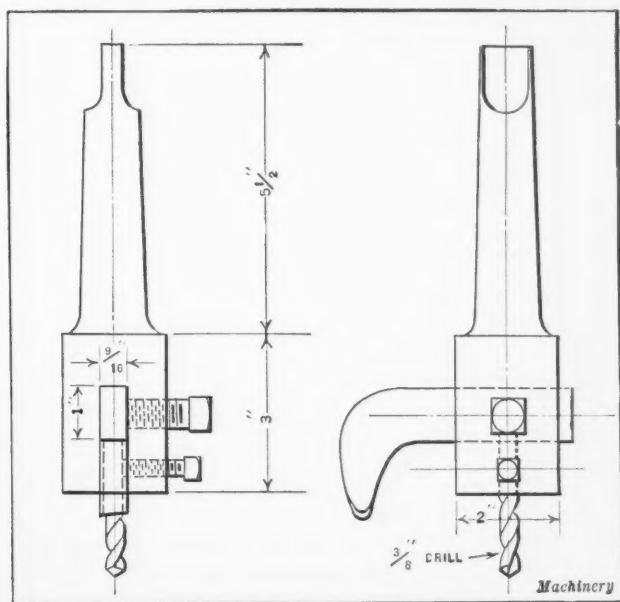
Drill Press Tool for Cutting Oil-grooves in Faces of Shoes, Wedges, and Driving-boxes
